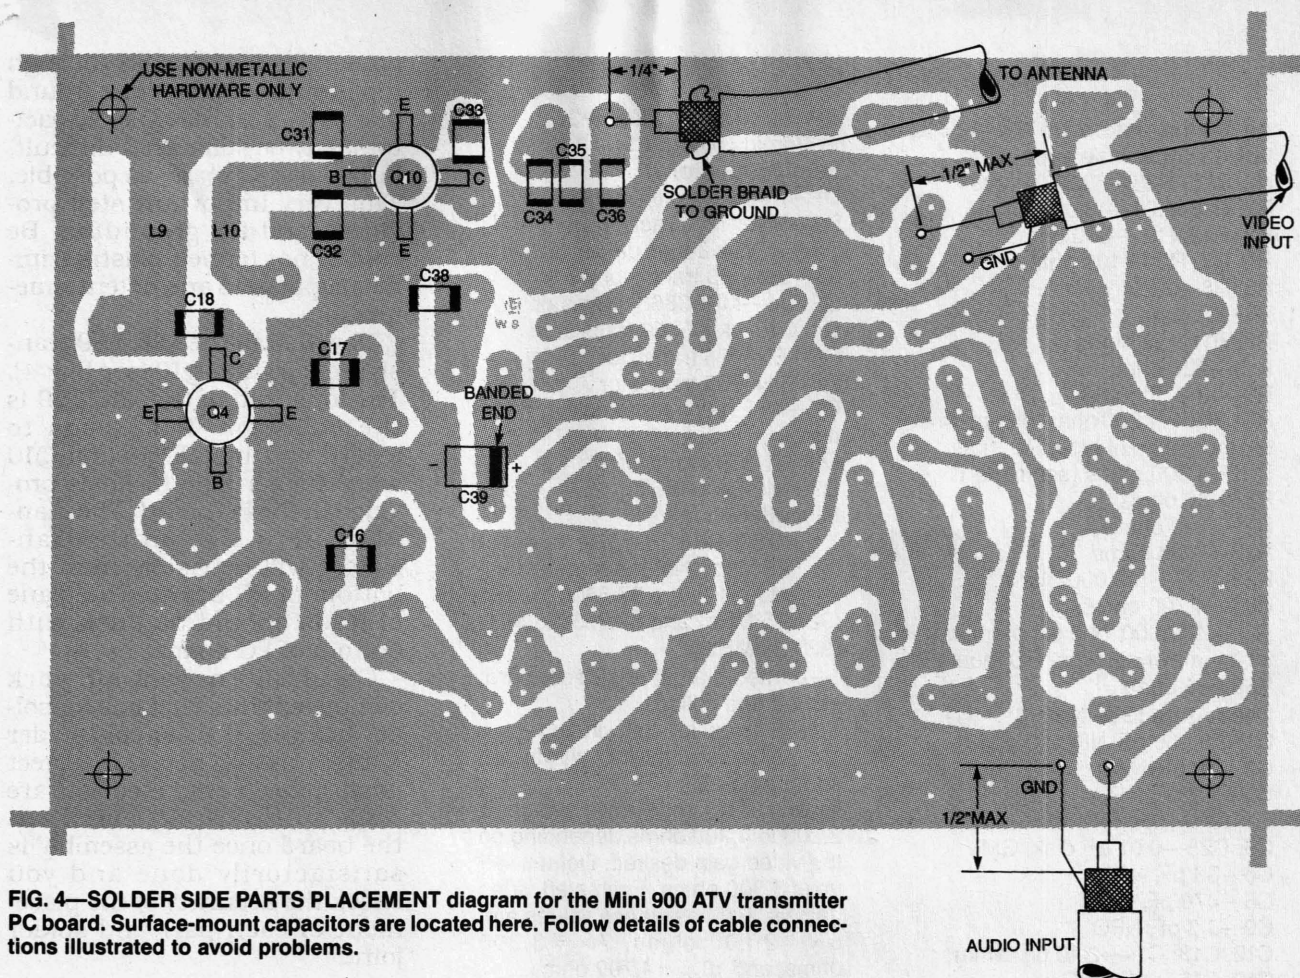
SOLDER SIDE PARTS PLACEMENT diagram for the Mini 900 ATV transmitter PC board. Surface-mount capacitors are located here. Follow details of cable connections illustrated to avoid problems.
